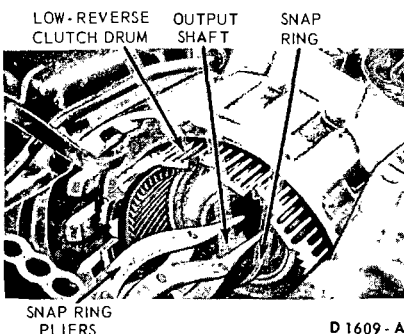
Removing or Installing Reverse Ring Gear Hub Retaining Ring
